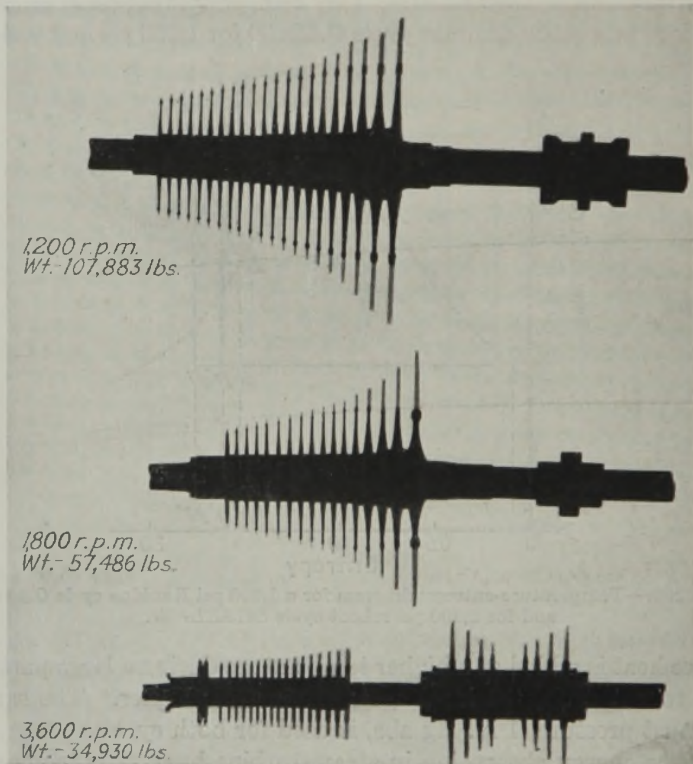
Three rotors for 50,000-kw General Electric condensing-steam turbines. Longitudinal sections.
